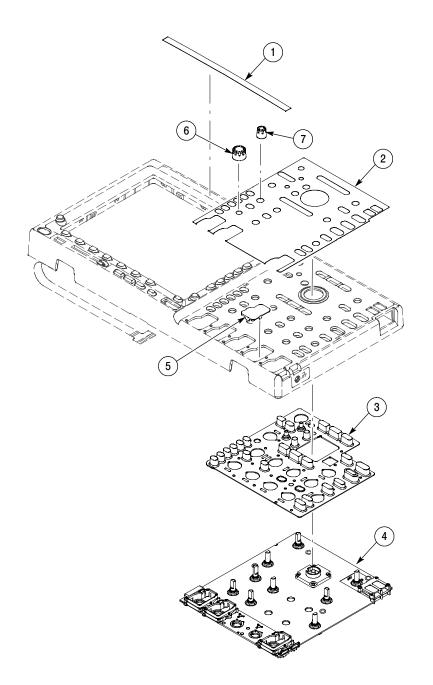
Exploded view: MSO4000 front panel and display, 2-channel instruments
